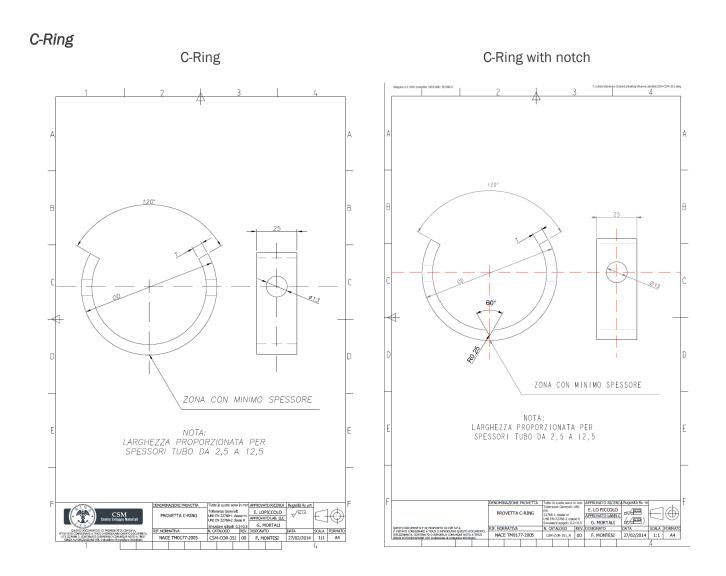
C-Ring with and without notch specimens plans, proposed by RINA.
